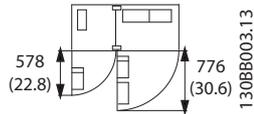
Front Clearance of IP21/IP54 Enclosure Type, Frame Size F9
